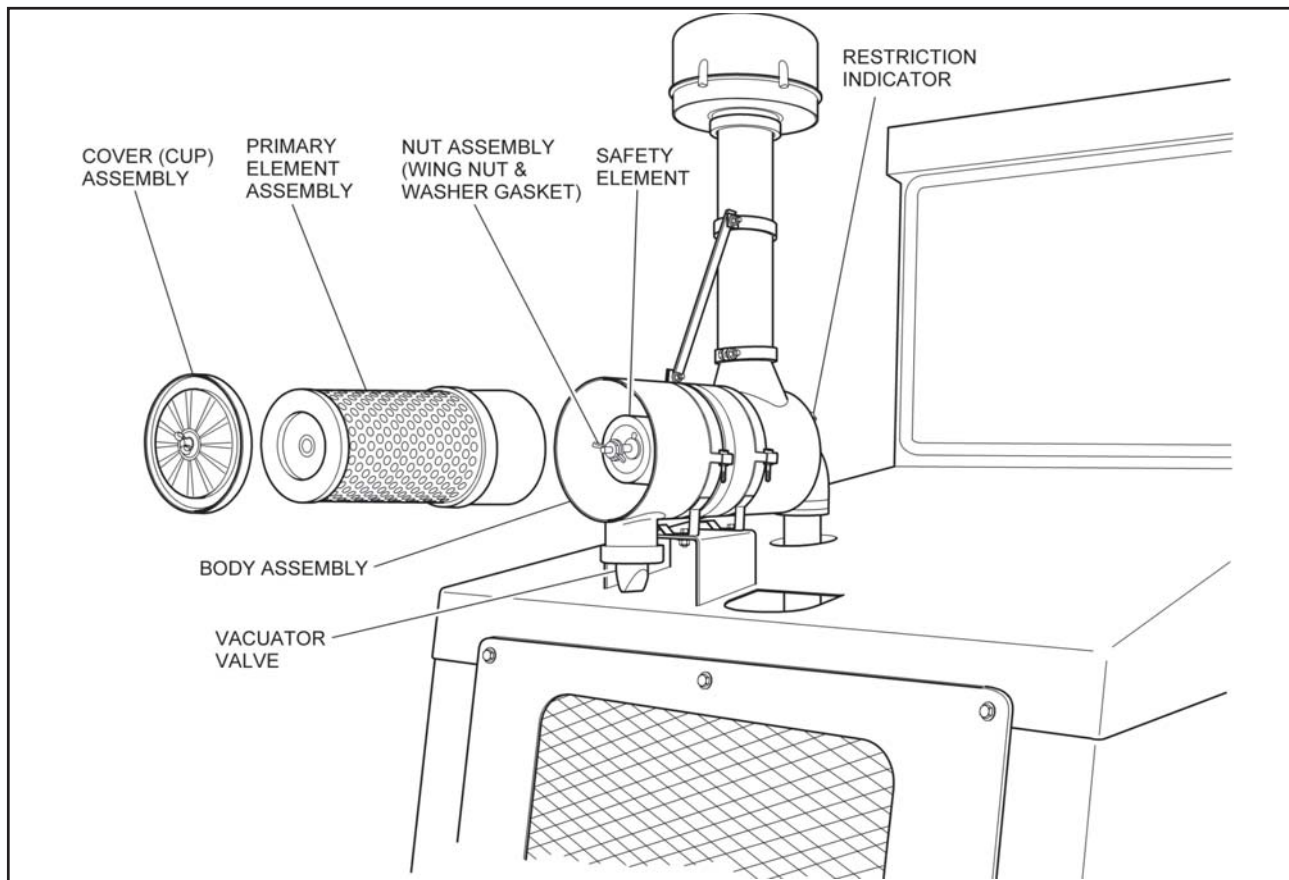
ENGINE AIR CLEANER ASSEMBLY
